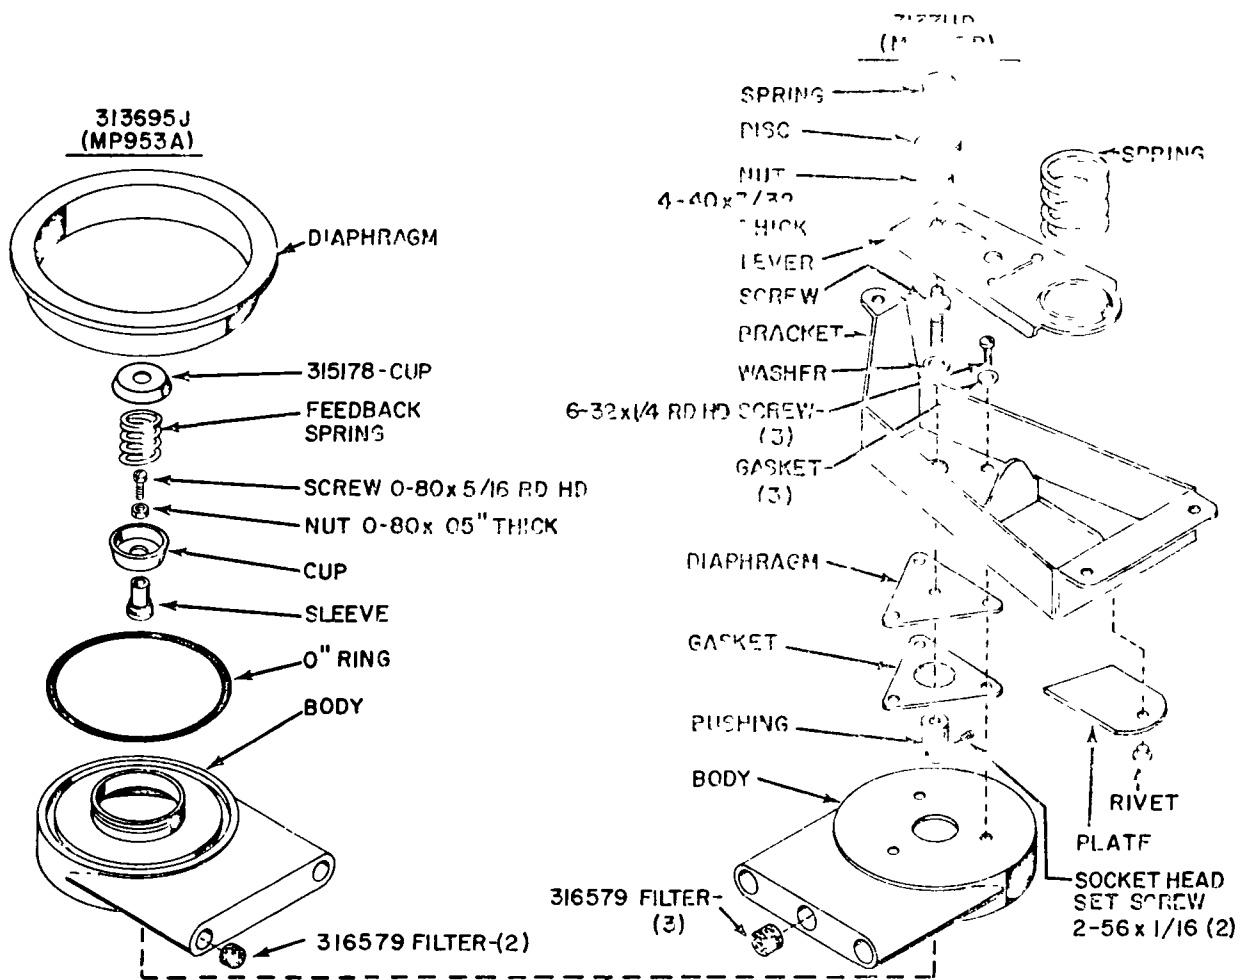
illustrates parts used in the old MO953 A4 and A8 Series 3 through 7 These parts are not available If repair is necessary, convert the actuator to a new style device by installing the new parts listed in Figure 7
